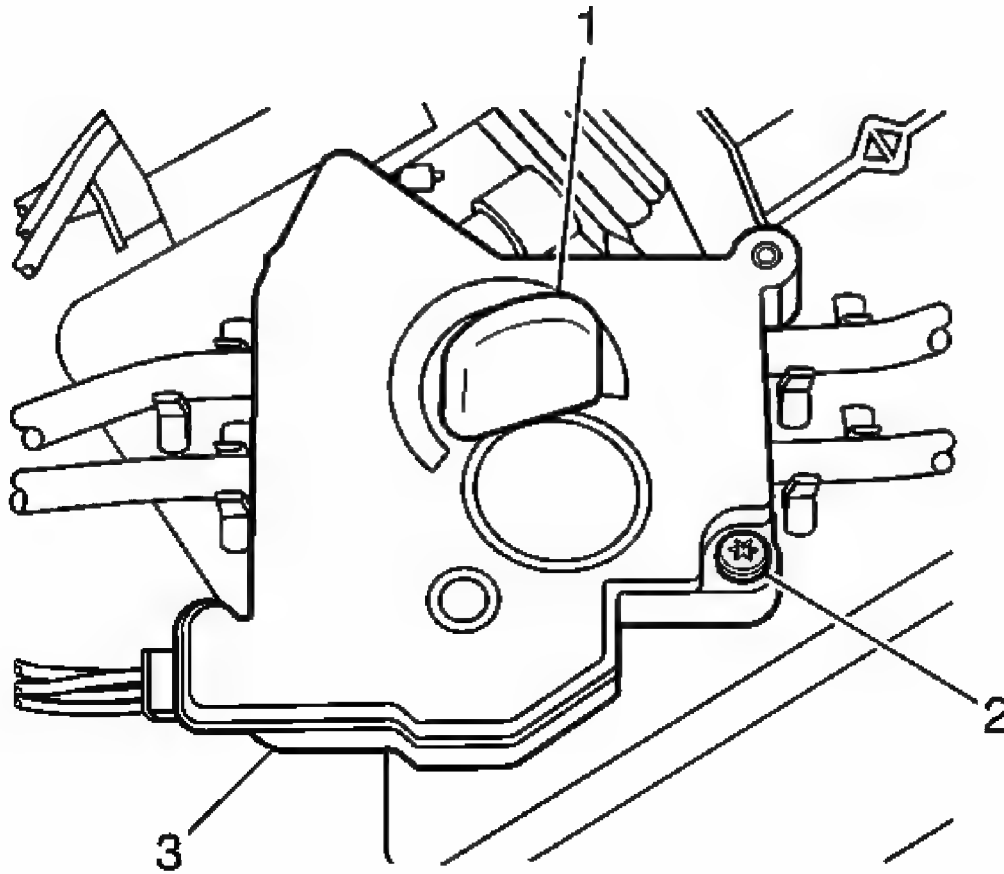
Identifying Sunroof Piston Lock Pin, Opening Position Switch & Screw
